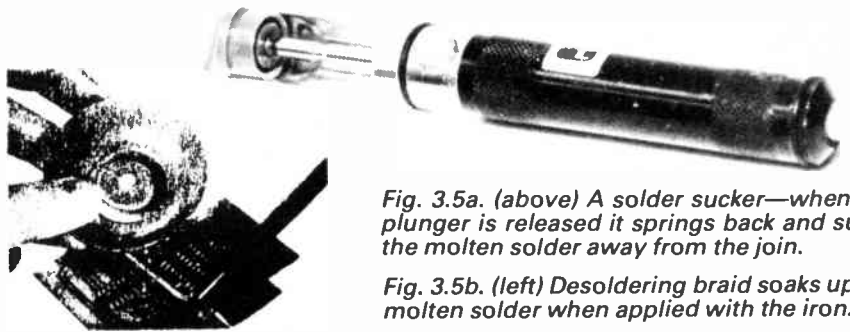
(above) A solder sucker—when the plunger is released it springs back and sucks the molten solder away from the joint.
